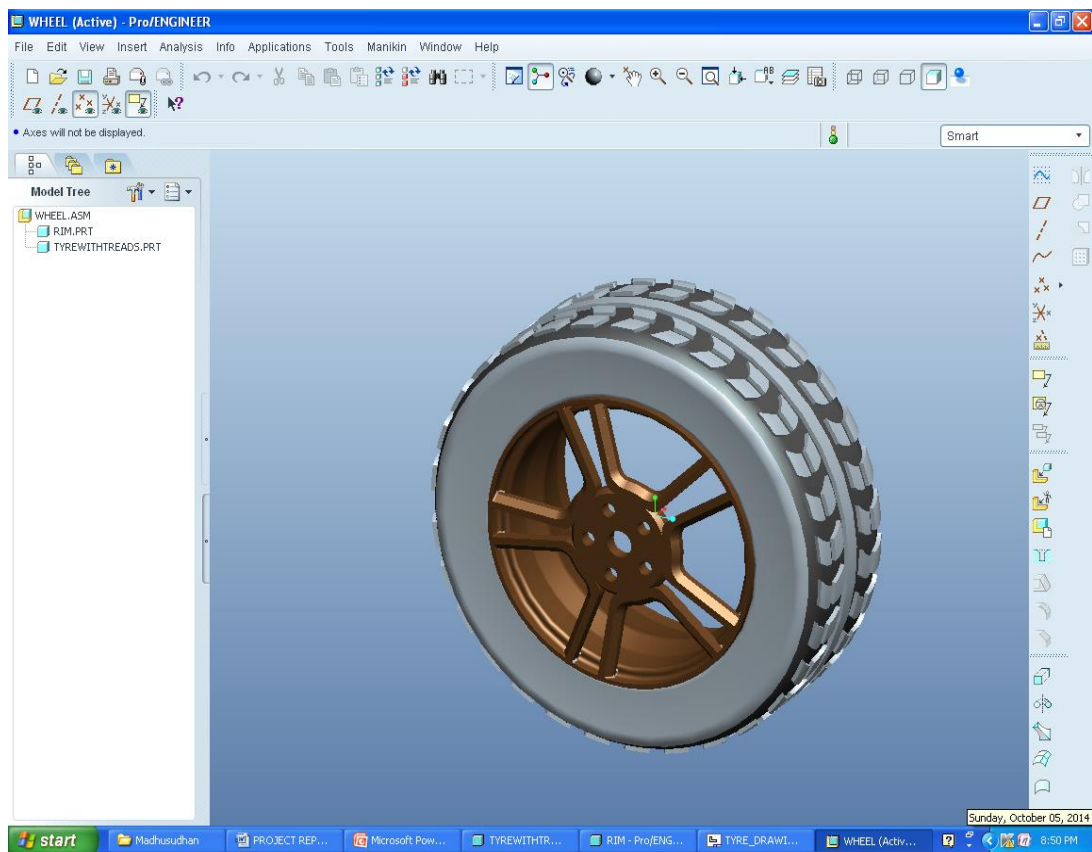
Pro-E Model of Skoda Car Tyre Assembly
